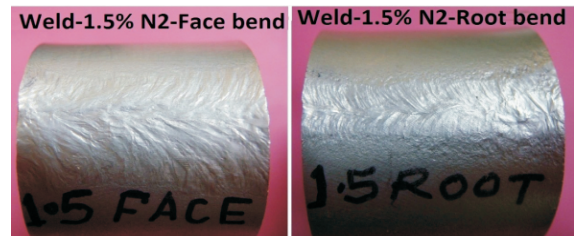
Guided bend tested GTA welded (shield gas: Ar + 1.5% N₂) 316L SS specimens.
